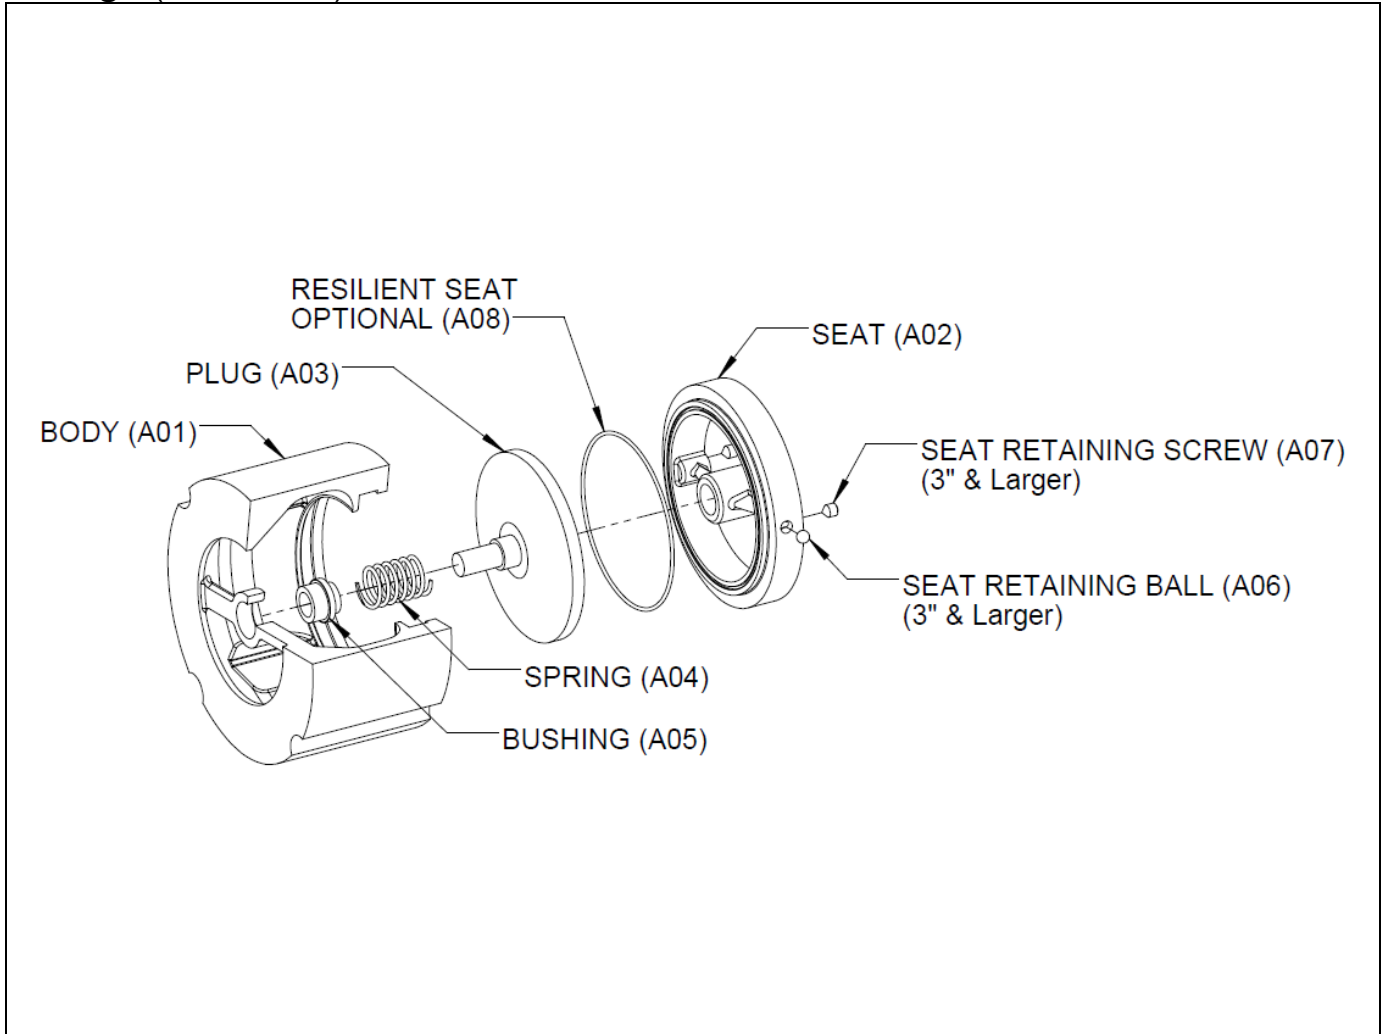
CSC-300A Globe Style Silent Check Valve (Exploded View, 3" & Larger)
